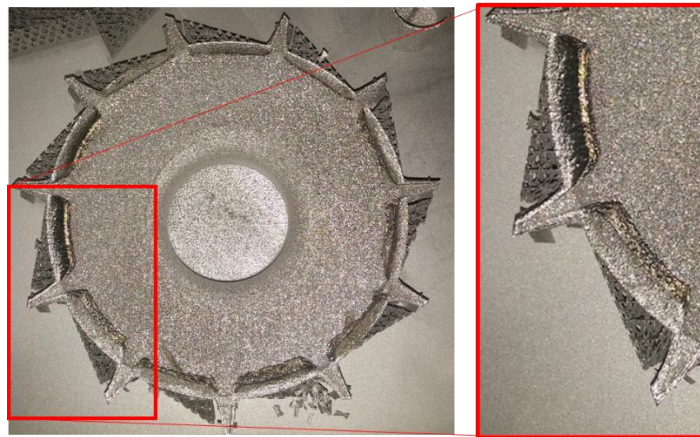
Photograph of failed shelled impeller build indicating region of peeling.
